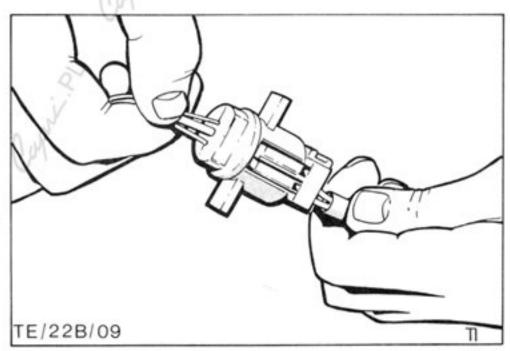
Disconnecting distributor loom multi-pug. NOTE: Pull wires not multi-plug
